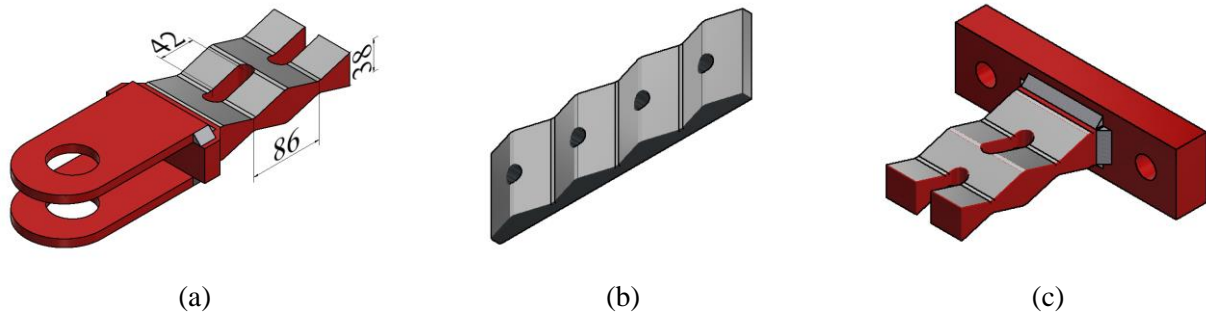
Detailed drawings of designed (a) middle plate towards the gusset plate, (b) cap plate, and (c) middle plate towards the diagonal rods (dimensions in mm)
